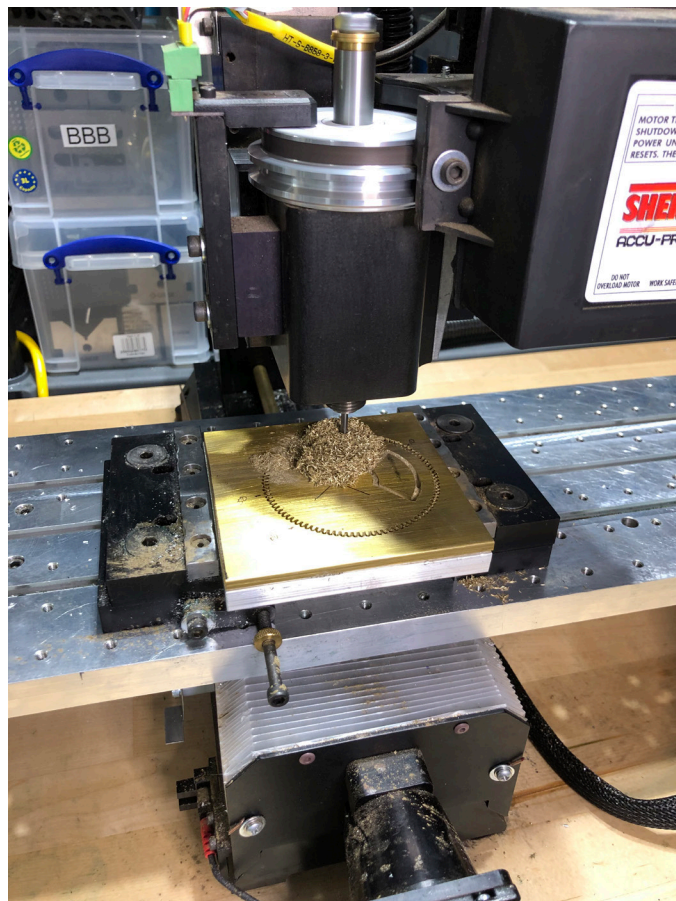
Cutting a main wheel for a new John Wilding clock. David used a 1/32" carbide end mill to cut the teeth (a slow process) and used a 3/32" end mill to cross out the wheel and cut the center hole.
